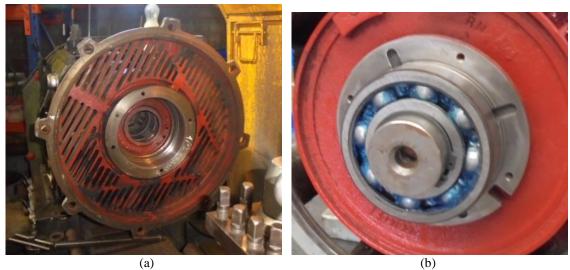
Parts of 22kW motor after maintenance: (a) bearing housing and (b) bearing
